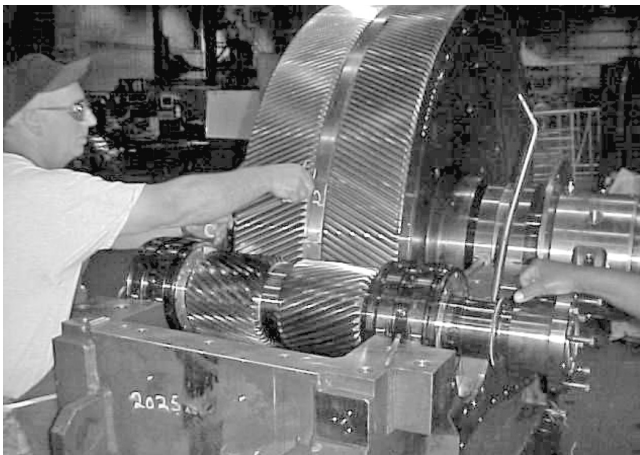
Double-Helical Gearset Used in a Motor–Compressor Drive.
